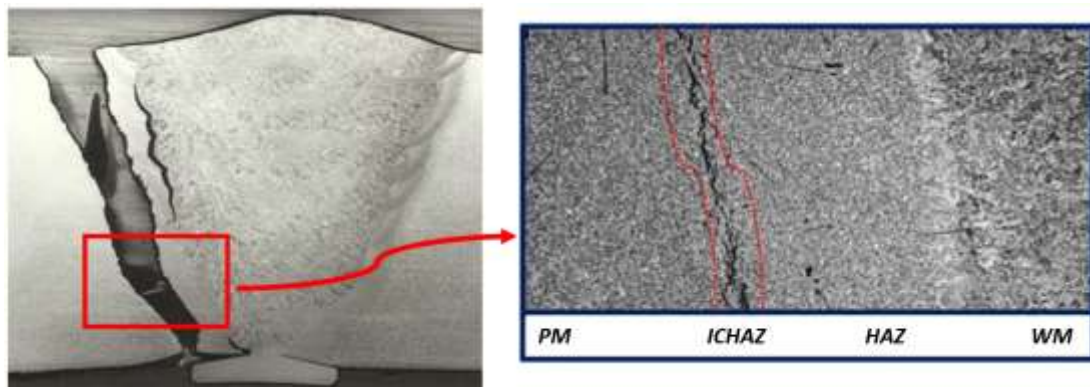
Type IV cracking in the ICHAZ region of P91 welded joint (R Barrett [20]).
